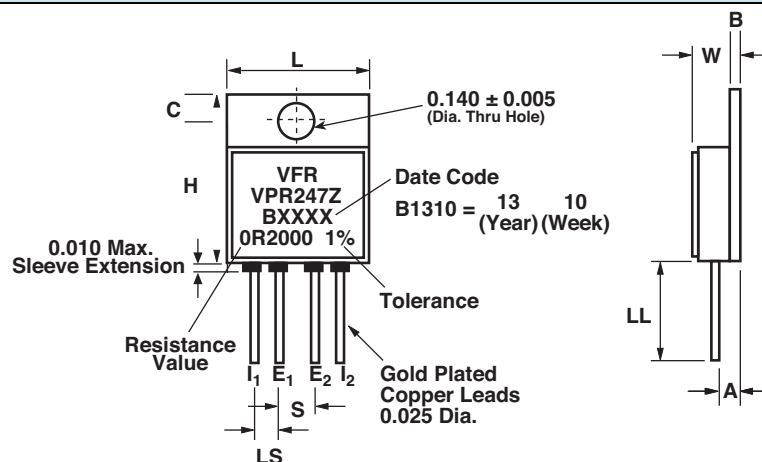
VHP4Z STANDARD IMPRINTING AND DIMENSIONS in inches (millimeters)
